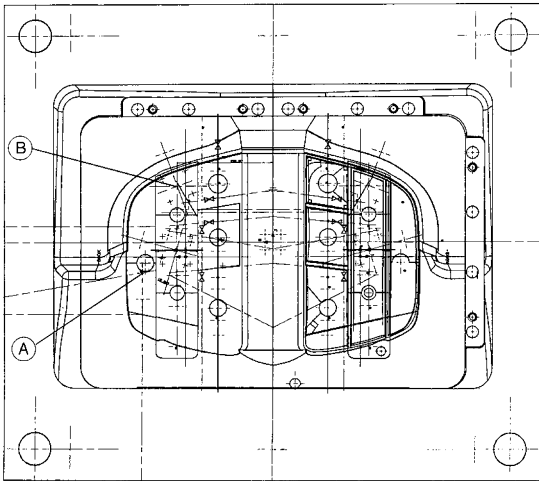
Injection mold, fixed mold half; A: needle shutoff nozzle; B: nozzle with edge gate
